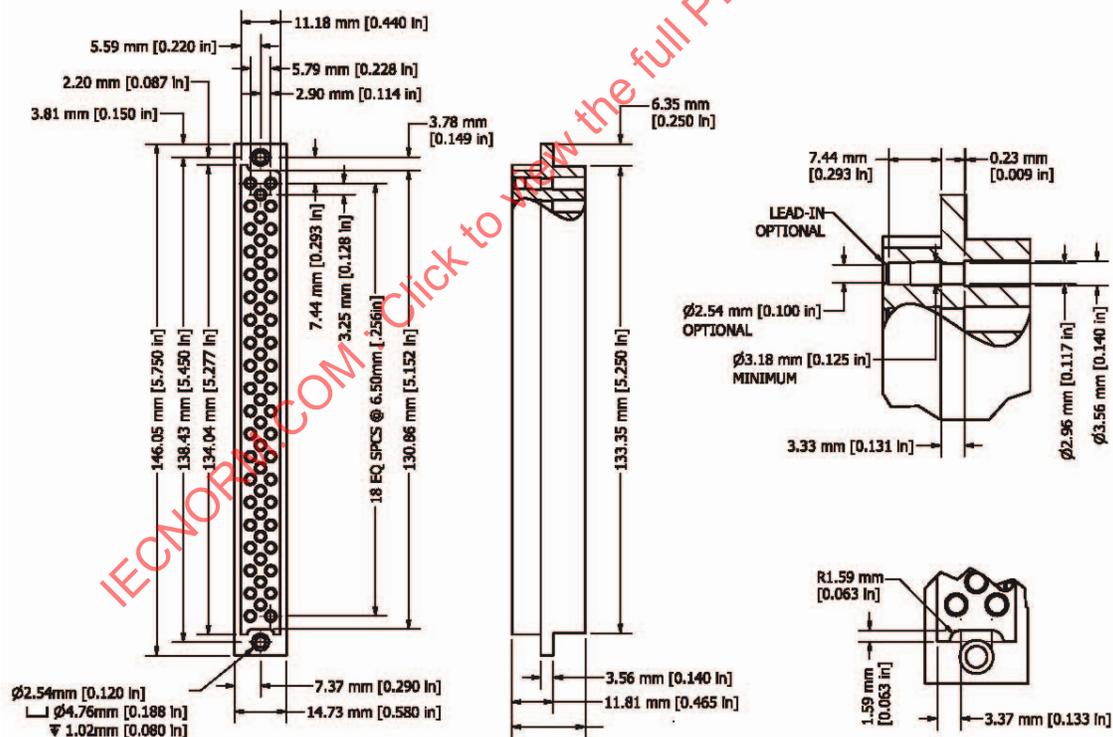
Coax module, 59 position for 5 GHz contact, receiver housing physical layout
